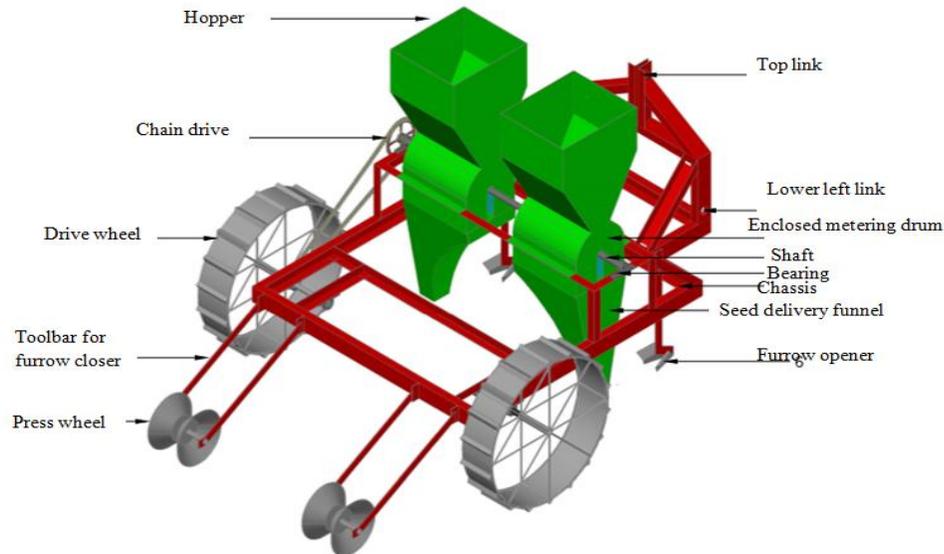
AutoCAD drawing of the Sugarcane billet planter
